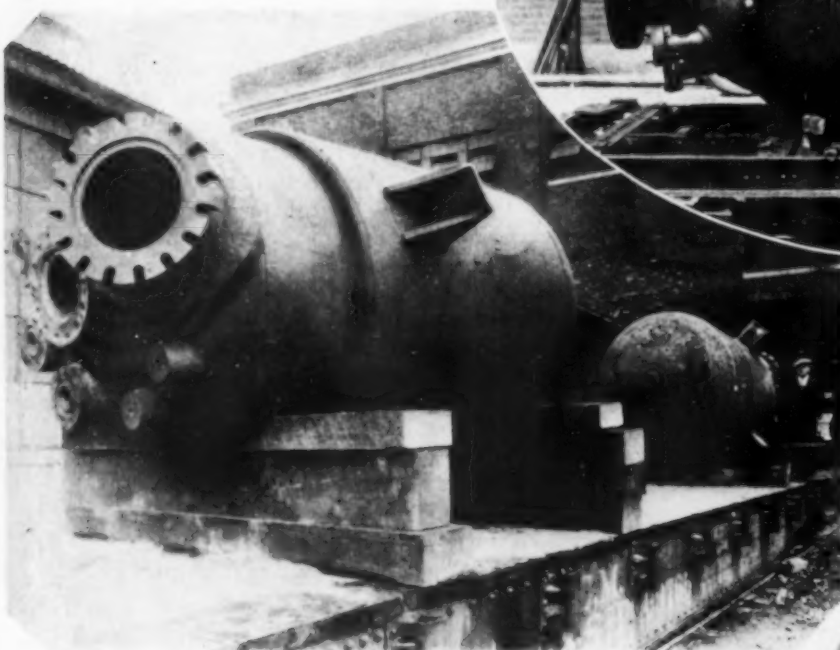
Hammer-Testing a Welded Autoclave Under Pressure Prior to Welding on the Jacket
